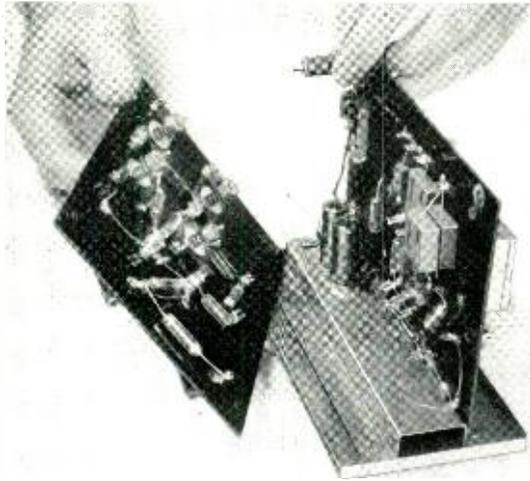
Fixed equalizer showing compactness of components and ease of assembly.
